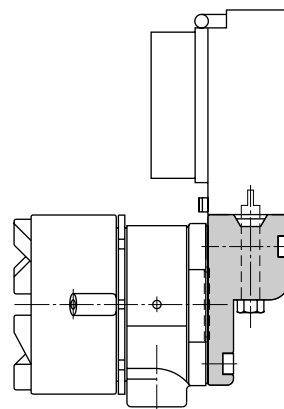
· Direct attachment to Type 3766-000 Positioner
